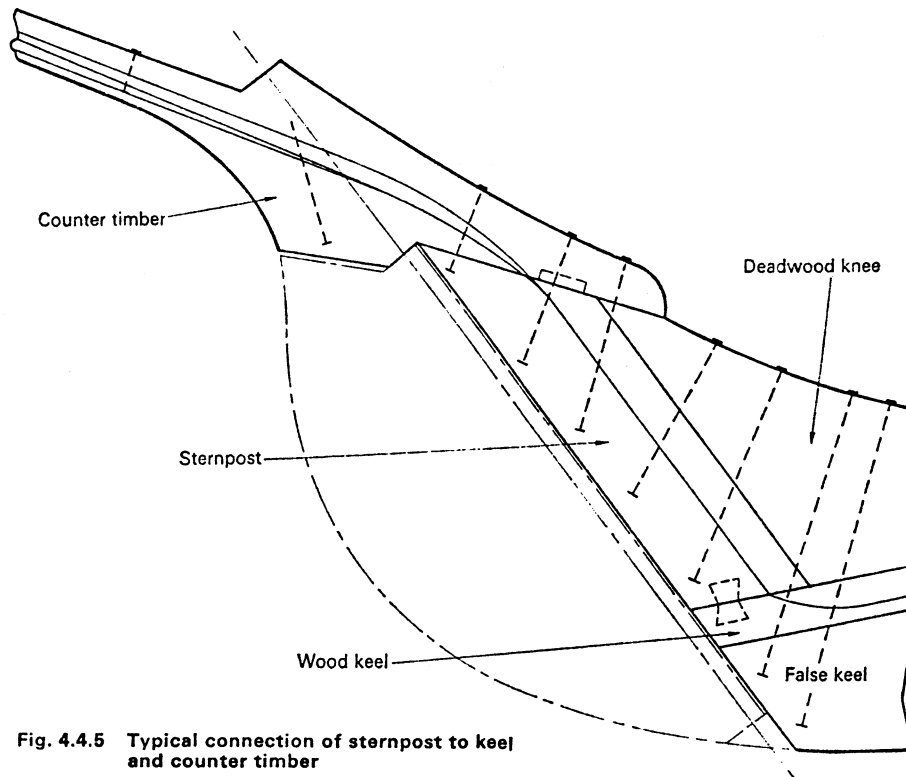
Typical connection of sternpost to keel and counter timber
